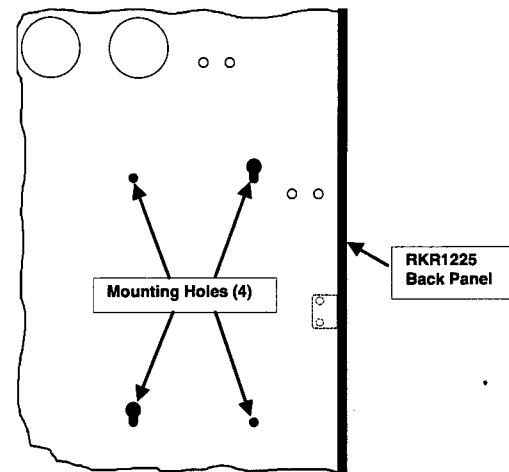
RKR1225 Battery Revert Mounting Hole Pattern (Bottom View)
